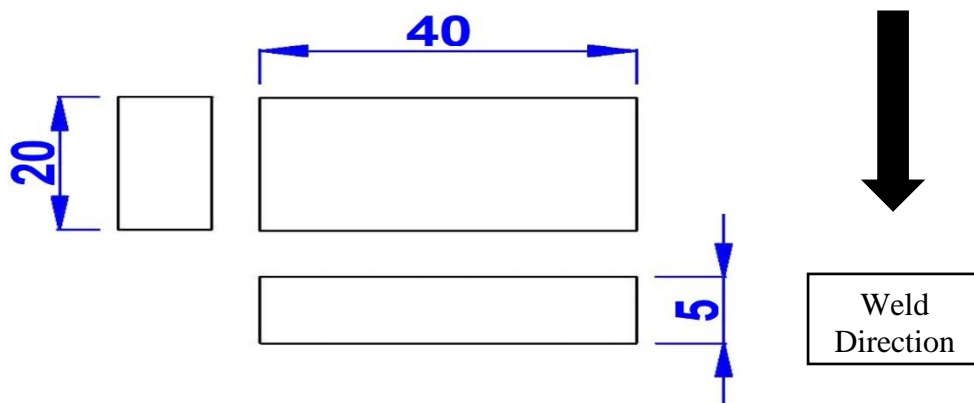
The Hardness Scheme Design (dimensions in mm)
